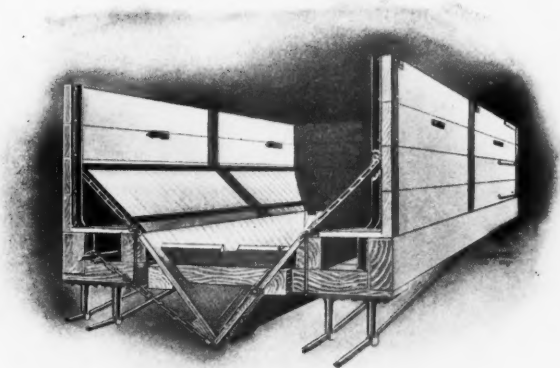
Section Just Ahead of Needle Beam—Car Arranged for Ballasting.
